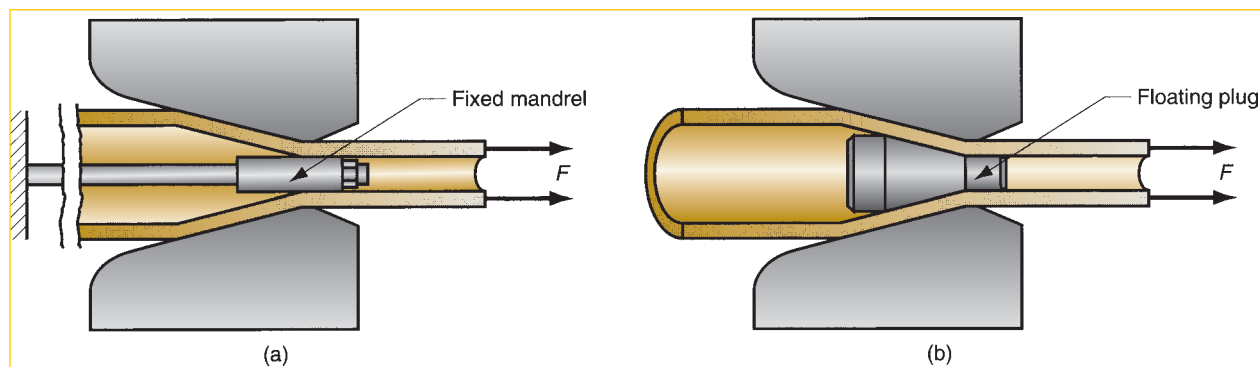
Tube drawing with mandrels: (a) fixed mandrel, (b) floating plug.
